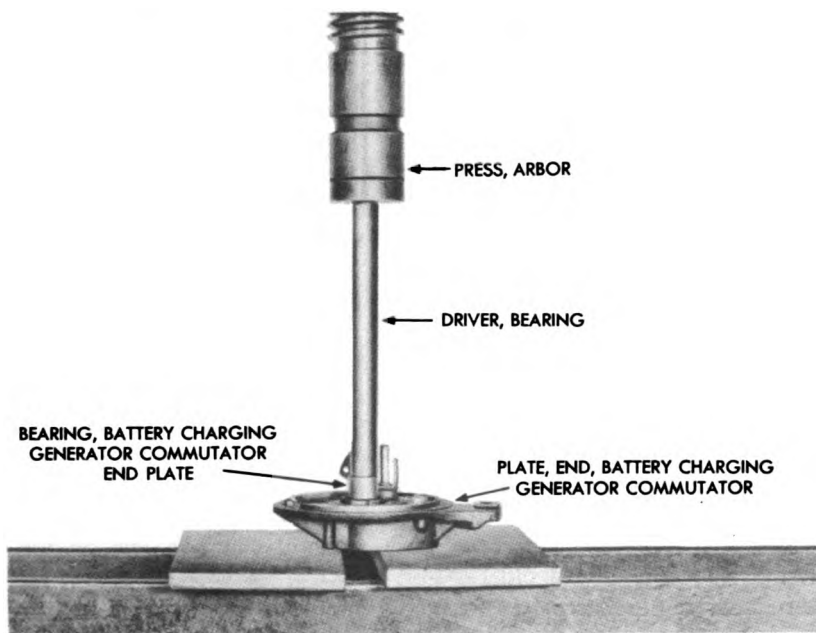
Pressing Commutator End Plate Bearing into End Plate RA PD 44901
